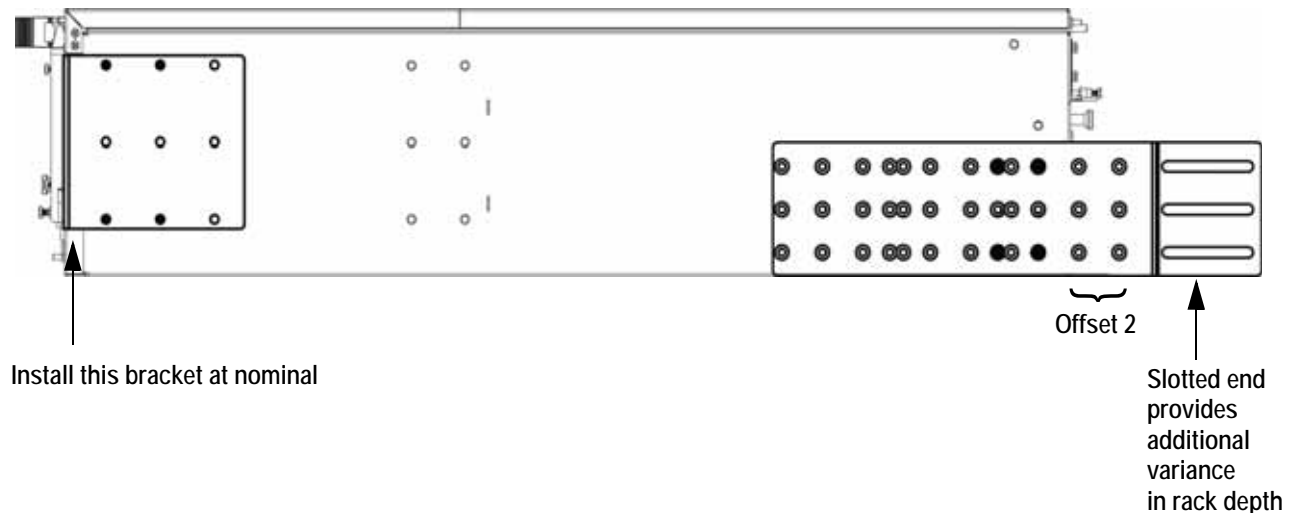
Bracket Mounting for 30.5" to 32" Rack
